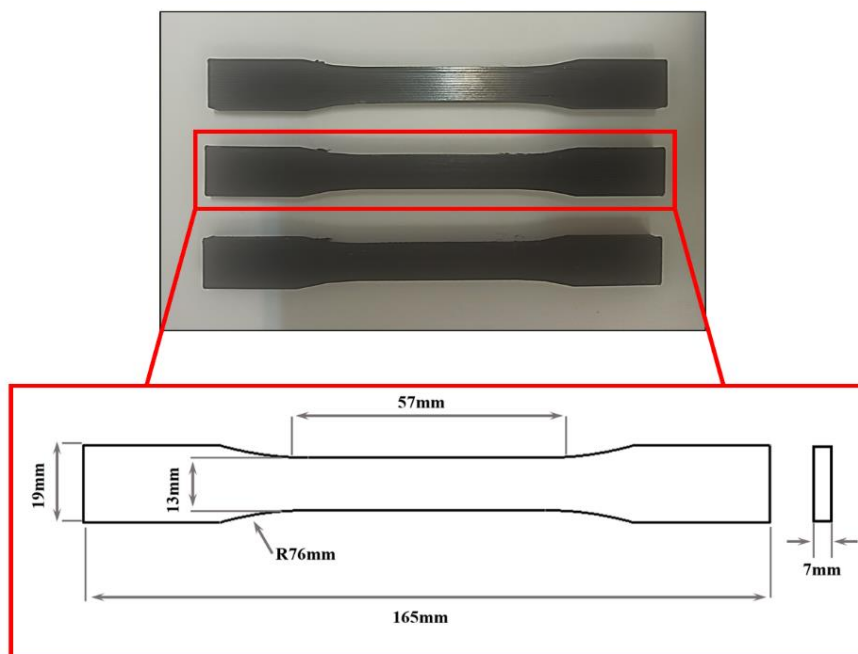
3D printed tensile test specimens based on ASTM-D638 standard
